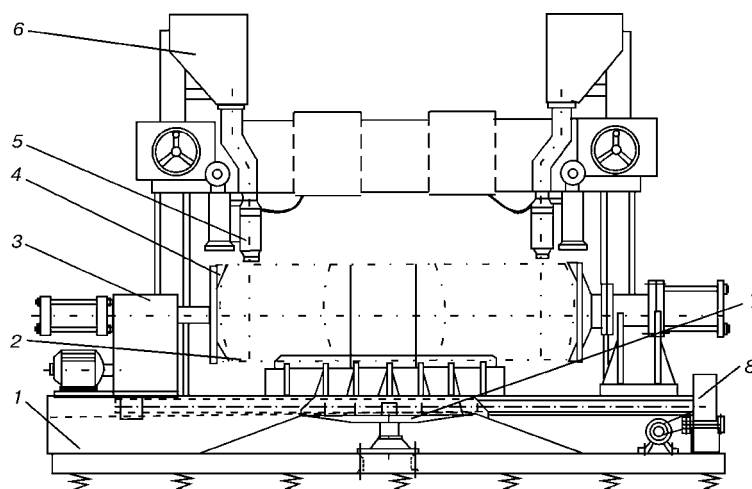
Schematic diagram of a specialized installation for simultaneous submerged arc welding of two circumferential welds: 1 — framework; 2 — tank; 3 — drive of tank rotation; 4 — clamp; 5 — welding head; 6 — hopper for flux; 7 — lifting table; 8 — drive for tank lifting
